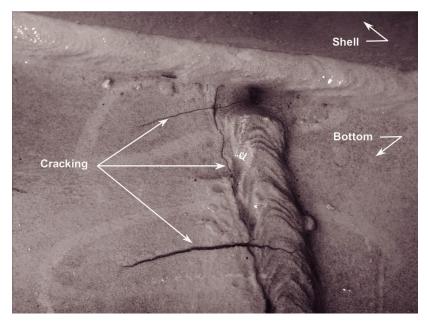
Cracks in Bottom Plate Welds Near the Shell-to-bottom Joint
